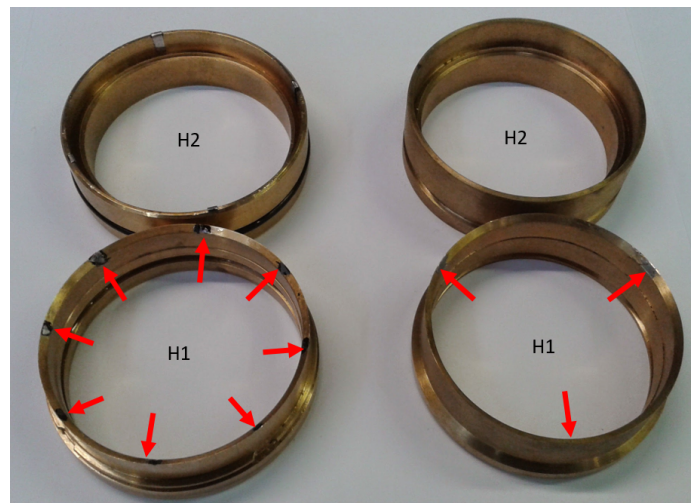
Fluidic Seal Inserts, Mk4 left and Mk3 right, with shim positions on the jet gap surface of insert part H1 indicated
